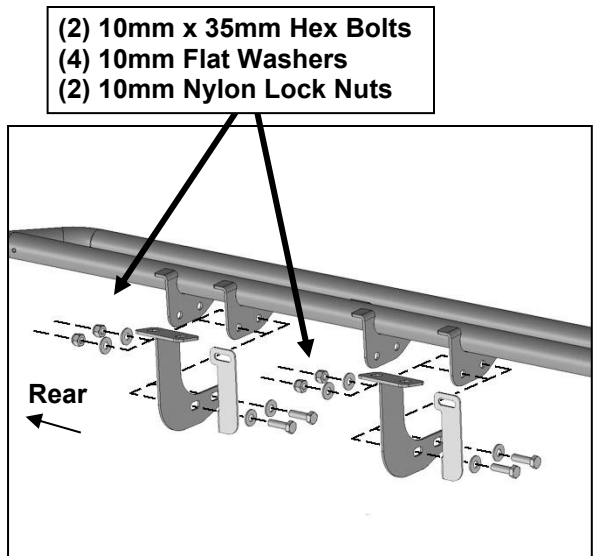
Rear mounting locations on bottom of Running Boards illustrated.
